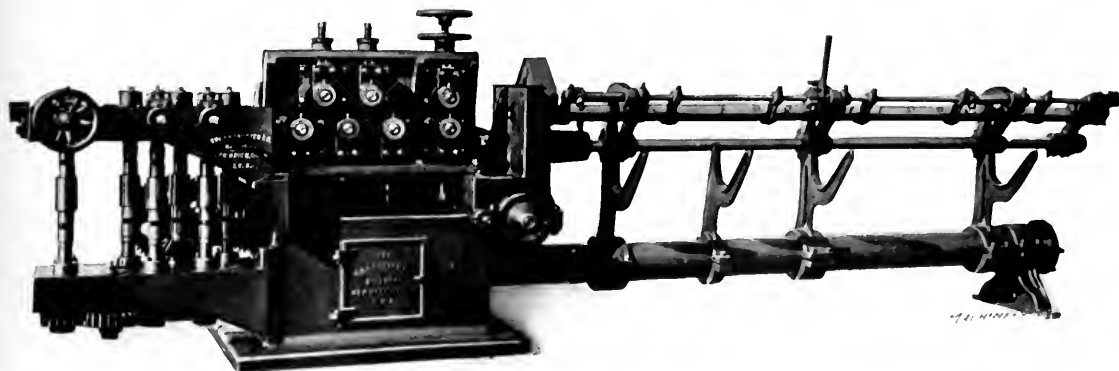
Shuster No. 17 Straightening and Cutting-off Machine for Square, Hexagonal or Round Stock
